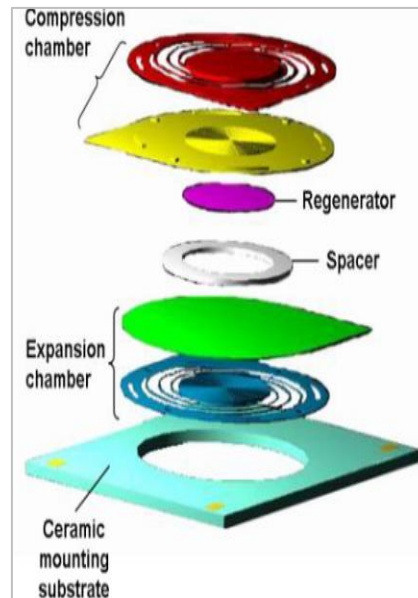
Micro-Stirling cooler design and assembly step [94].
